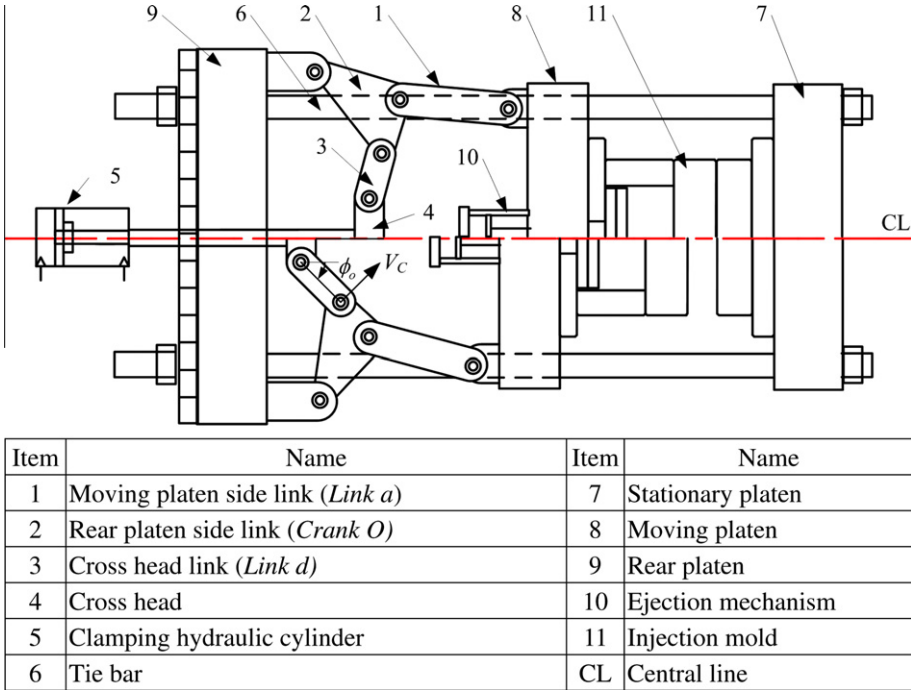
Structure of a five-point double-toggle clamping mechanism.
